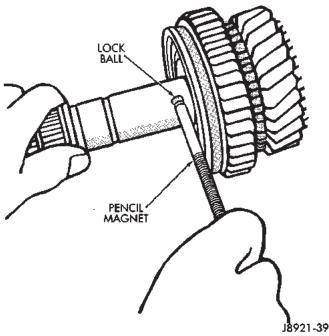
Remove First Gear Bearing Inner Race Lock Ball
